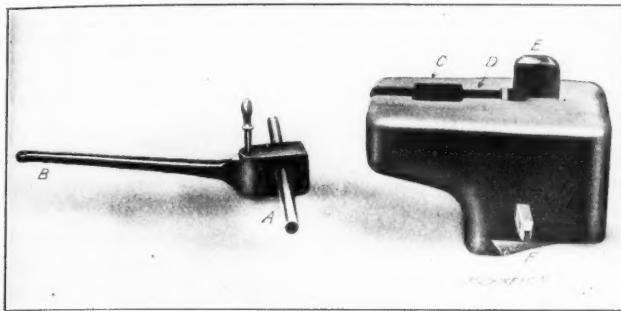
Upsetting Attachment for Preparing Heavy Shafts for Welding.
